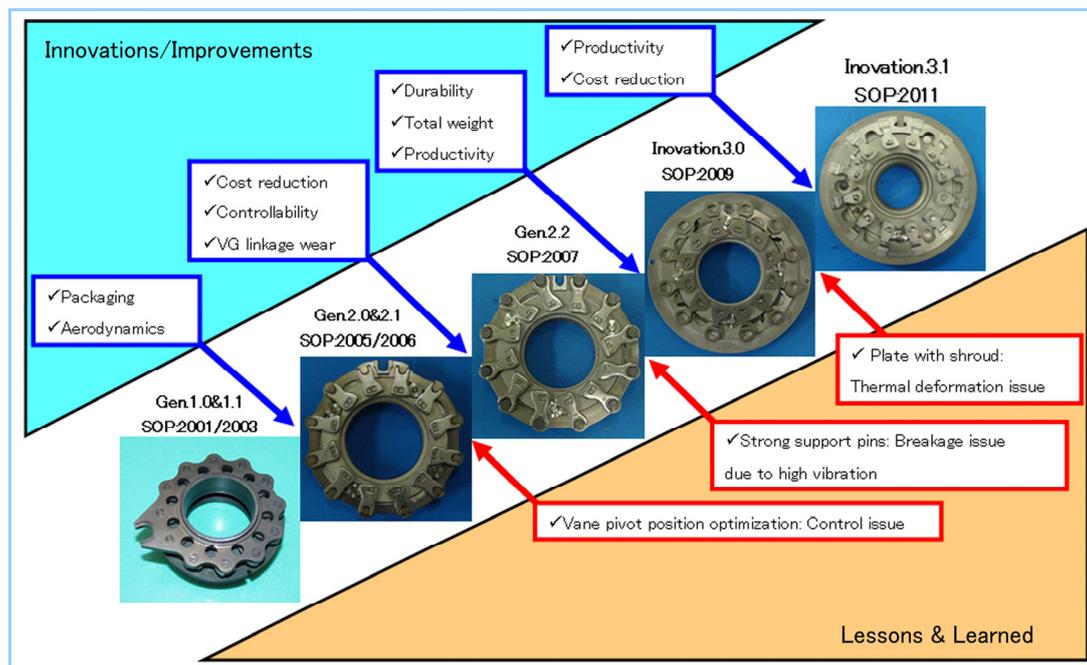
Improved nozzle assembly for the automobile VG turbocharger
